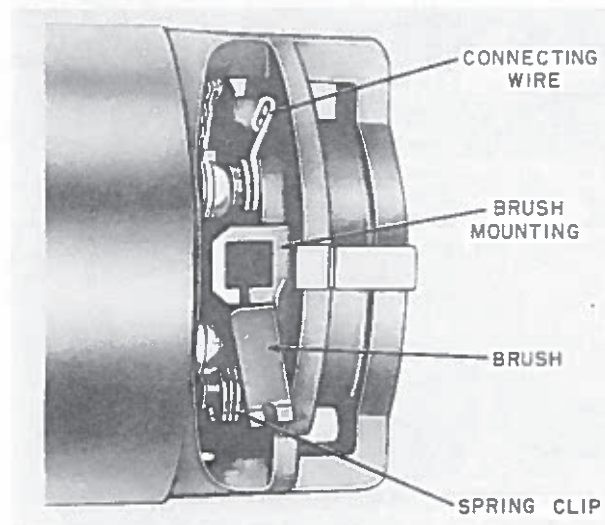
Brush Holder and Brush Assembly, Steering Motor.
